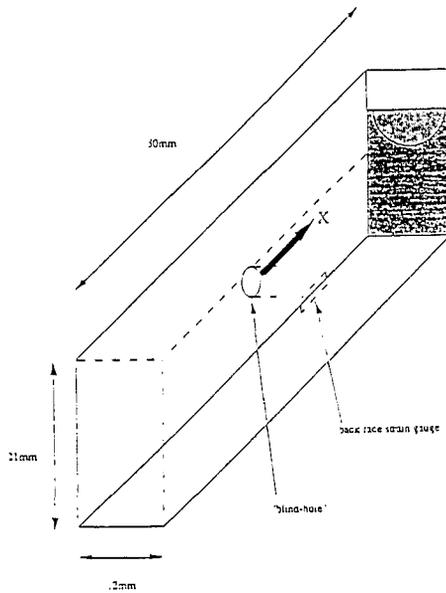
A schematic diagram of the combined surface removal techniques employed.
